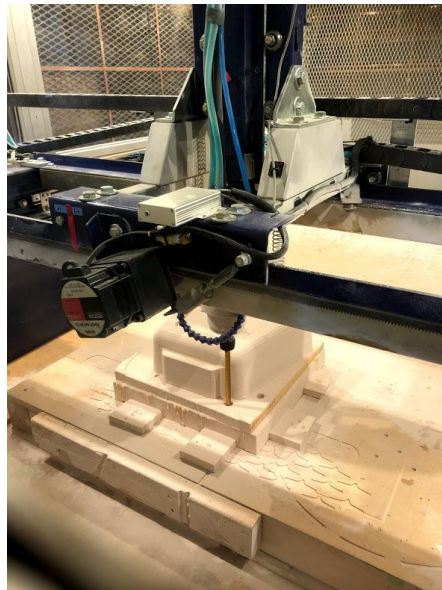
The machining of one of the baby mold plug quarters done on a 3-axis router.
